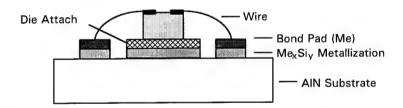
Schematic of die attach and wire bonding in a package assembly.
